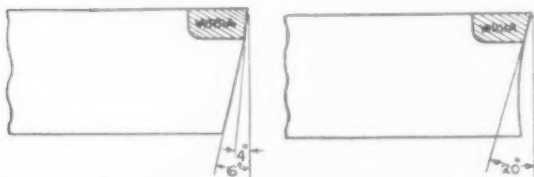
and Fig. 3.—The proper and improper grinding of the clearance on a Widia tool is shown at the left and right respectively. Improper methods result in a greatly weakened cutting edge.
